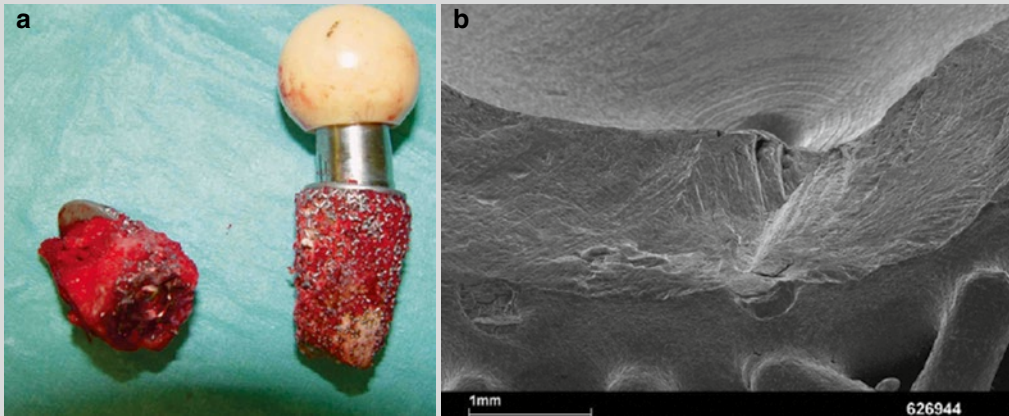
(a) The fractured stem, (b) the photograph of the fracture surface which shows the fatigue failure (Reproduced from Ishaque et al. [12])
